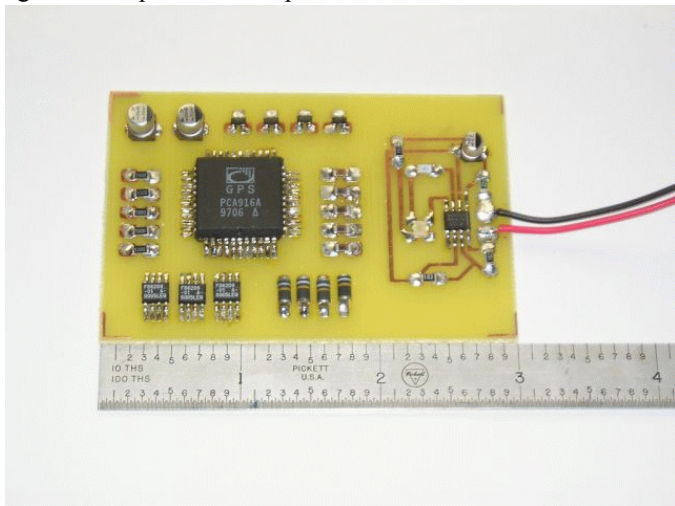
The Chaney Electronics C6719 "Learn to Solder" kit fully assembled. An excellent way to become familiar with handling and soldering surface-mount components.
